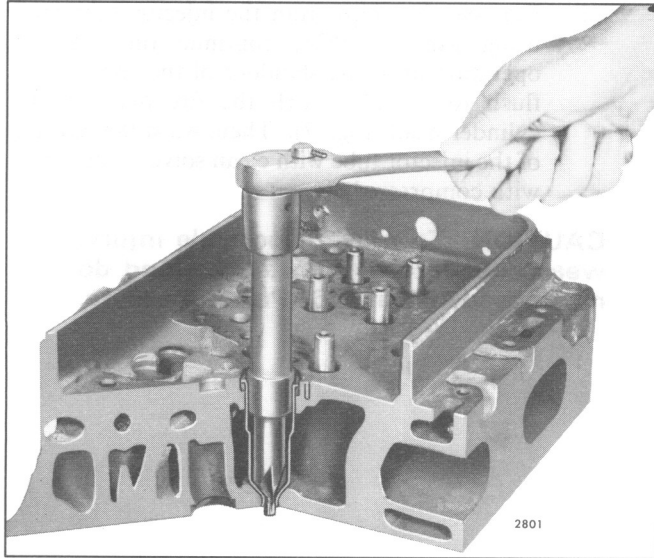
Reaming Injector Tube for Injector Nut with Tool J 5286-9
